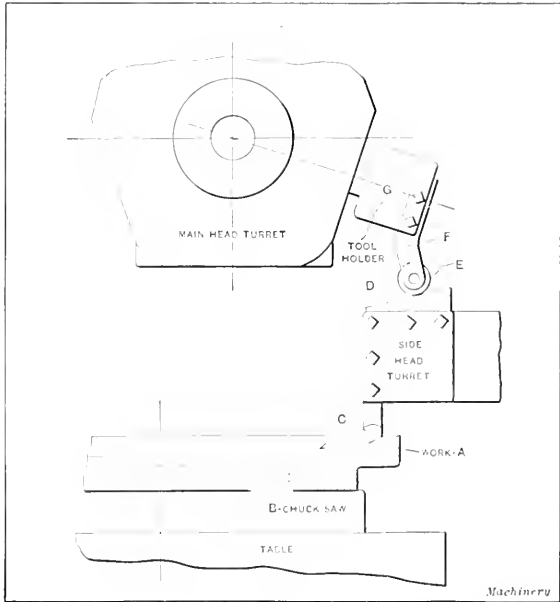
Emergency Taper Attachment for Vertical Turret Lathe Work
